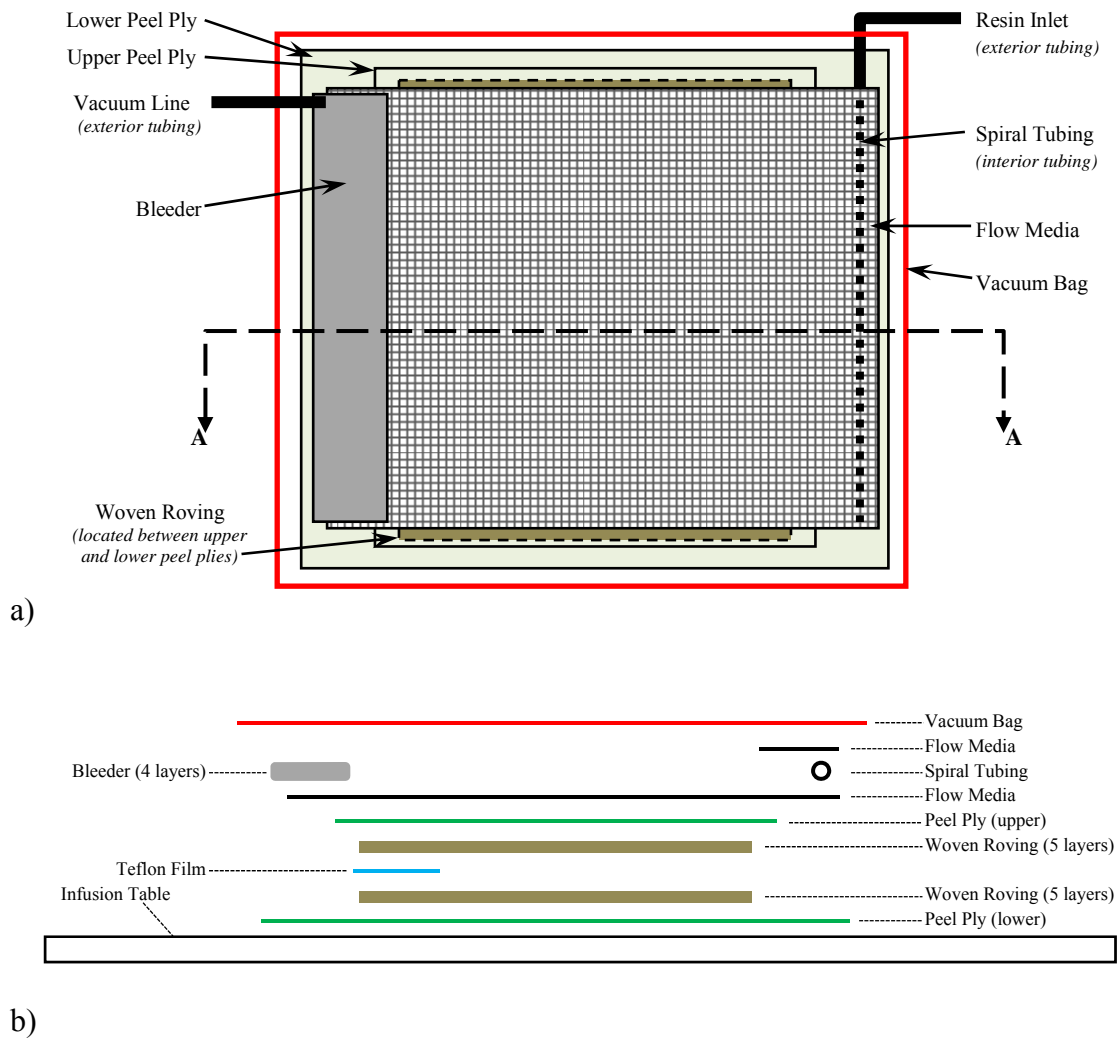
Panel layup: a) top view, and b) exploded view of section A-A.
